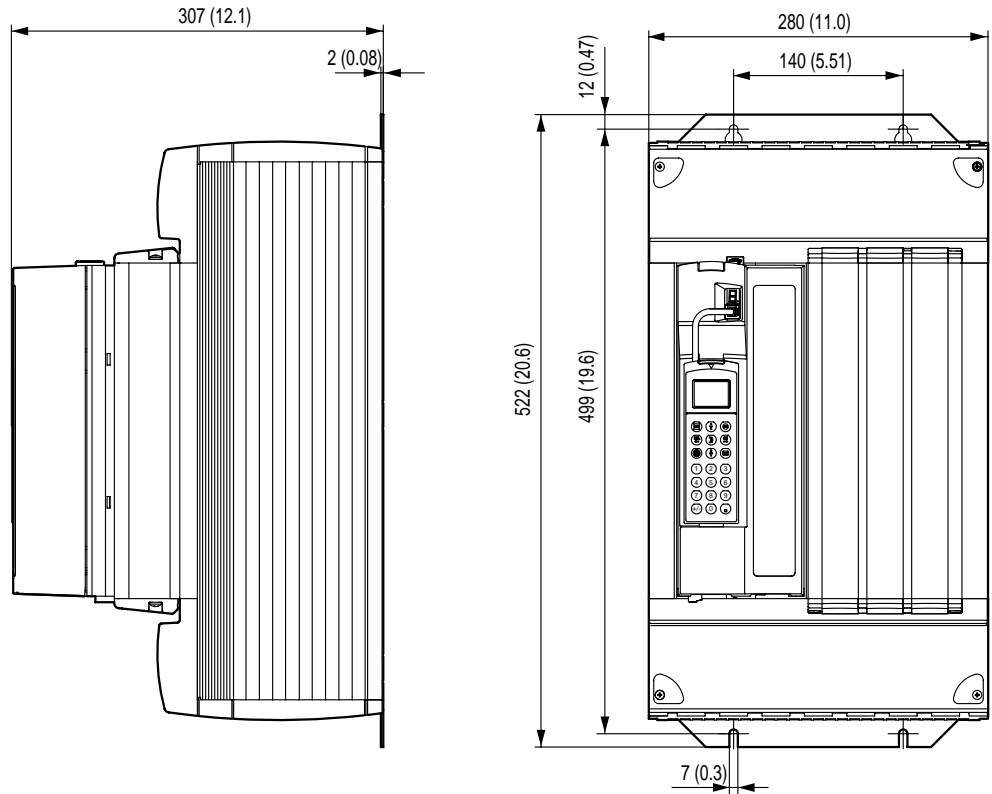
Dimensions for MDX61B size 4, dimensions in mm (in)
